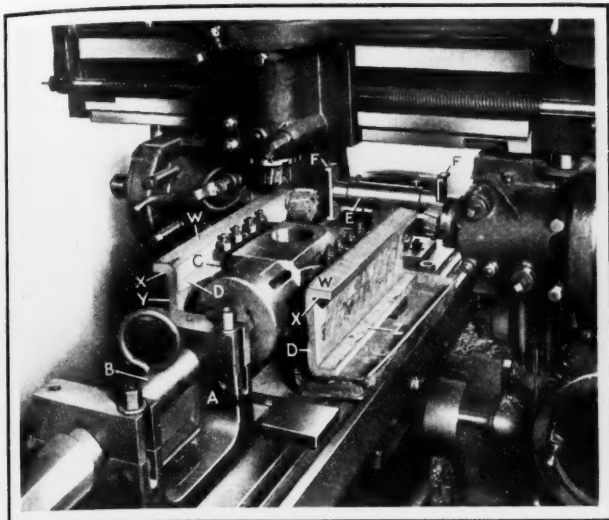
Milling Four Surfaces of the Shoes of Two Cross-heads Set up in Tandem
